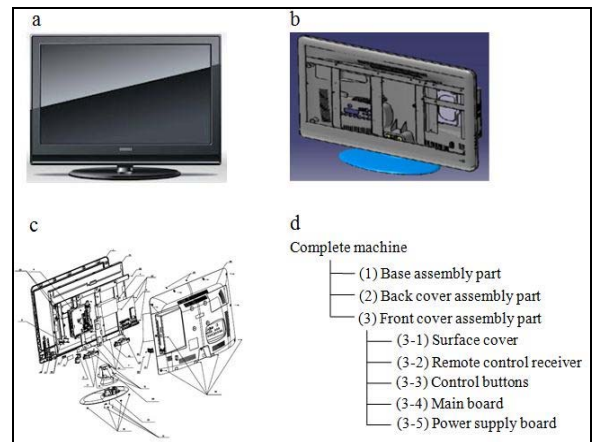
The LCD televisions and its structures (a) LCD television; (b) LCD television CAD model; (c) exploded view of LCD television structure and (d) parts of LCD television
